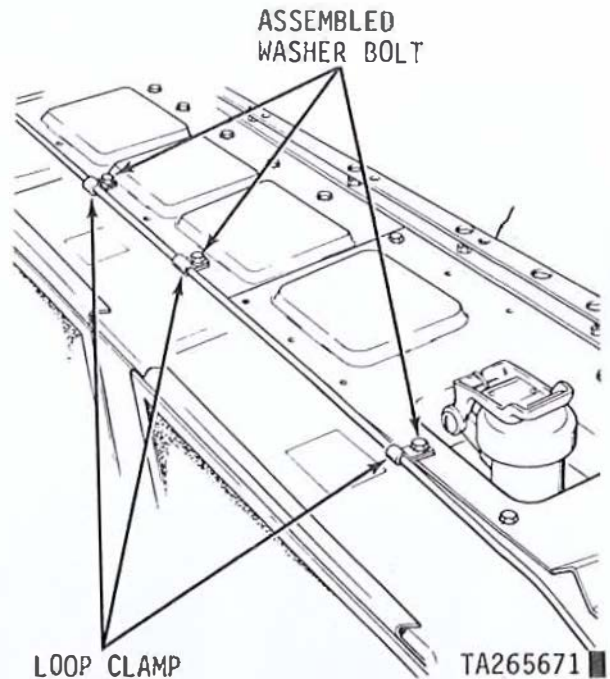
Removing or installing smoke generating system fuel tube loop clamps.
